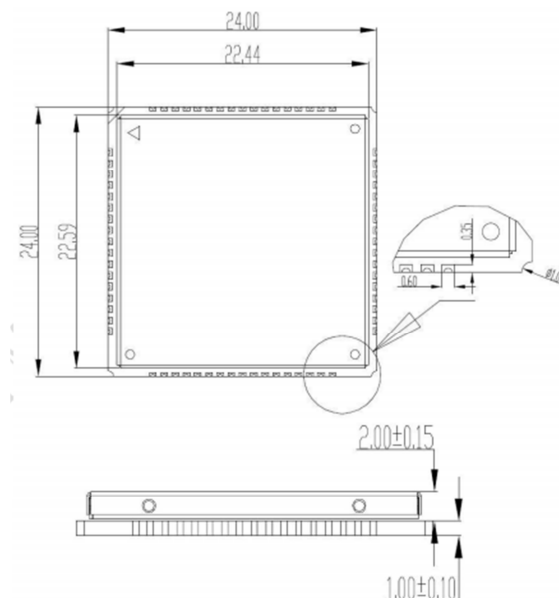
Top an Side Mechanical dimensions of module (Unit: mm)
